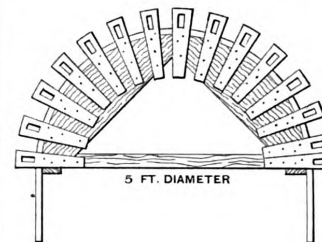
Arrangement for Forcing Material Upon the Drum.
